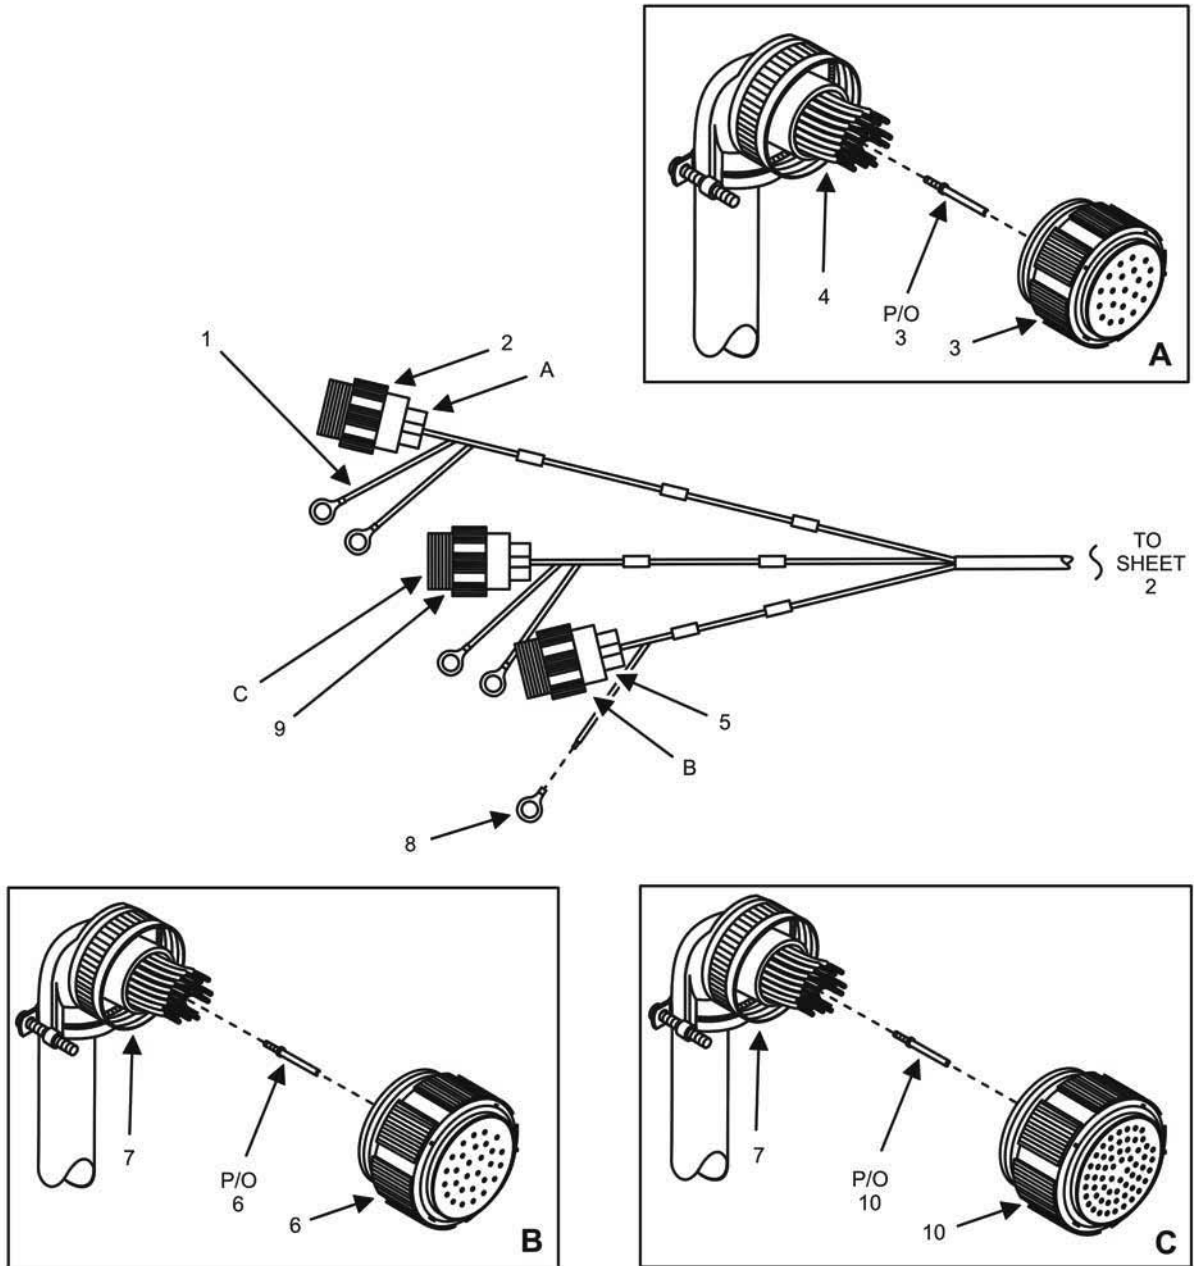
Engine Wiring Harness (Sheet 1 of 14).
